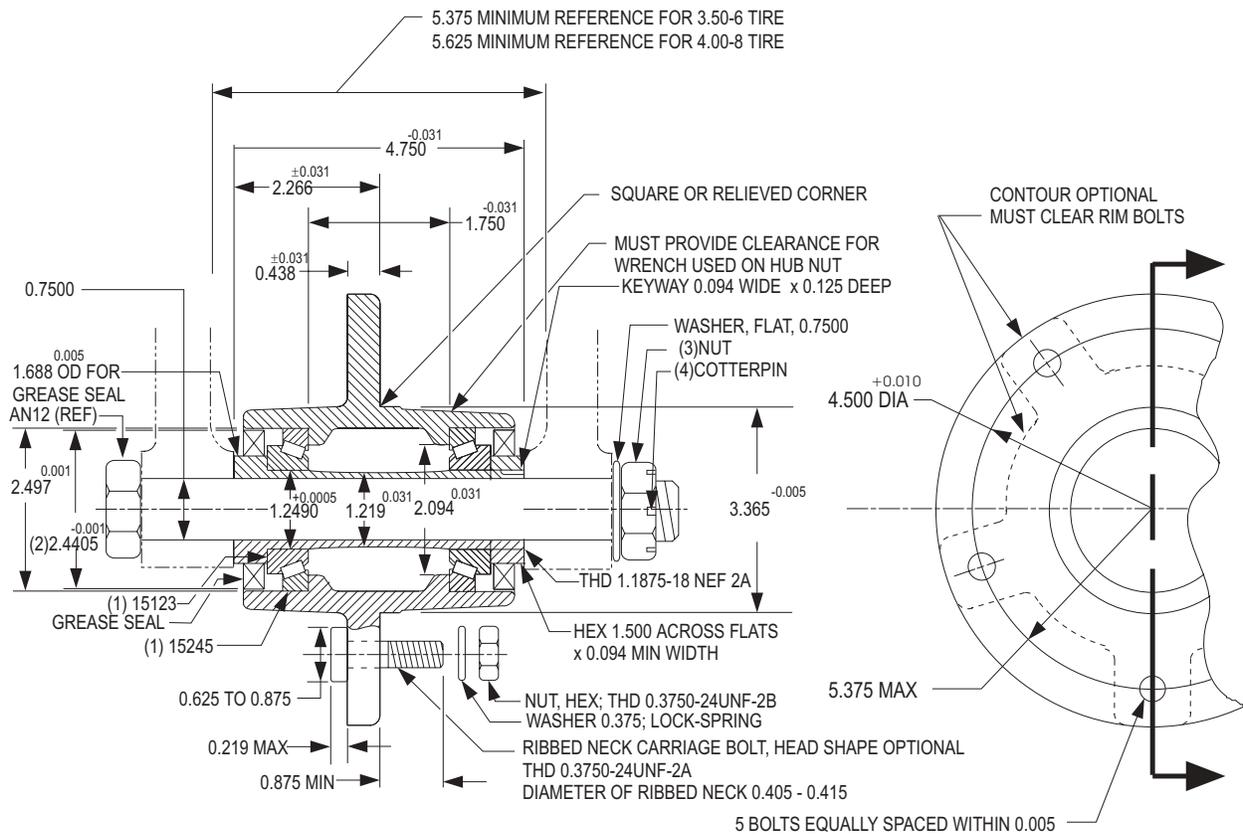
Hub assembly, cantilever mounting, for 3.50-6 or 4.00-8 wheels
